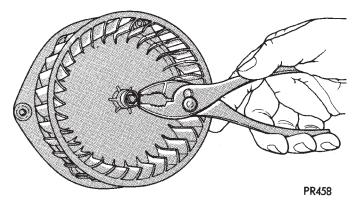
Blower Wheel Retaining Ring Removal and Installation
